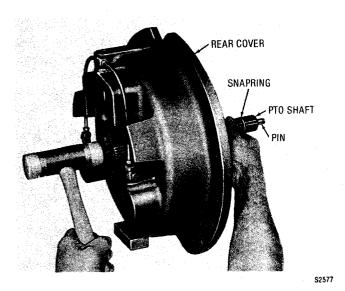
Removing PTO shaft from rear cover (TTB)
